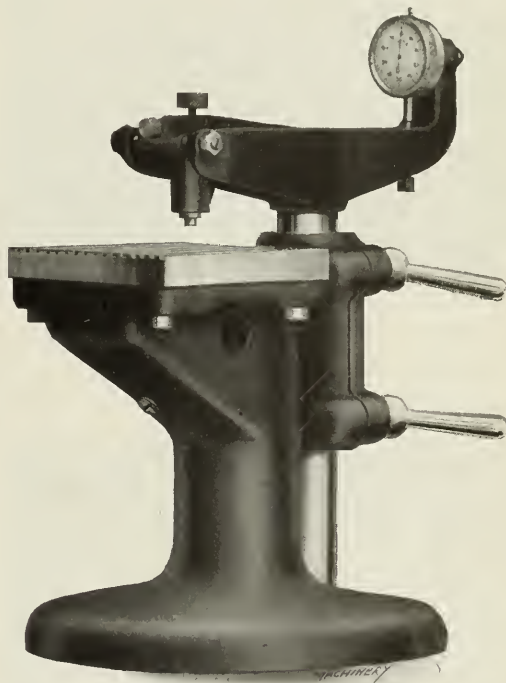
No. 67 Universal Amplifying Gage made by North Side Tool Works
